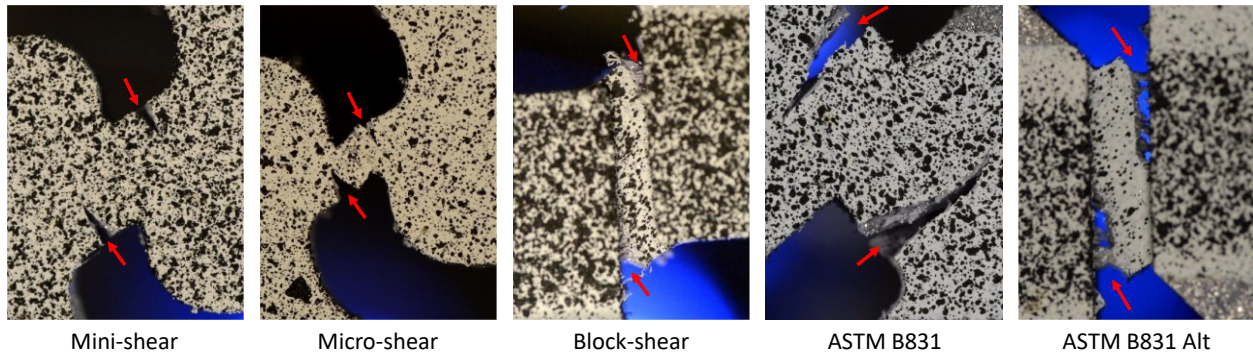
Fracture location of each bulk shear specimen tested, with fracture initiation noted with red arrows
